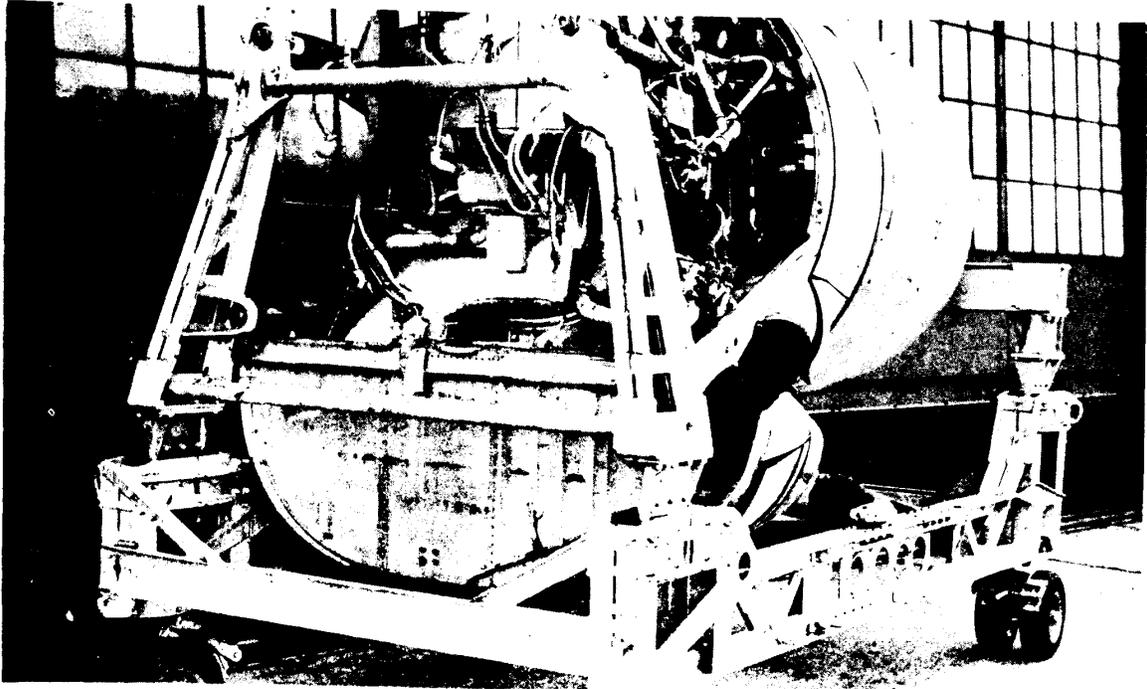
Trailer 55J9109 with KC-97 Power Package Installed, Right Rear Three-Quarter View
